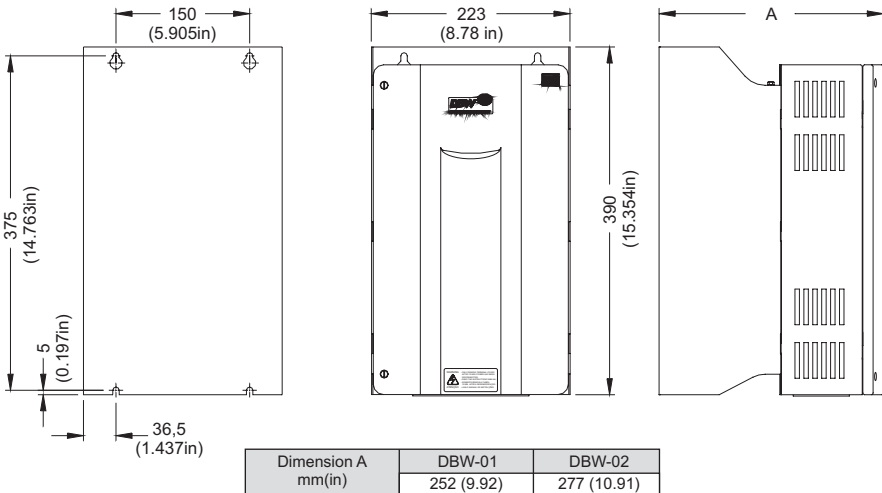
Dimensional Drawing of DBW-01 and DBW-02mm (inch)
